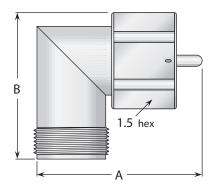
(Right angle plug–jack; connects one plug and one jack)
